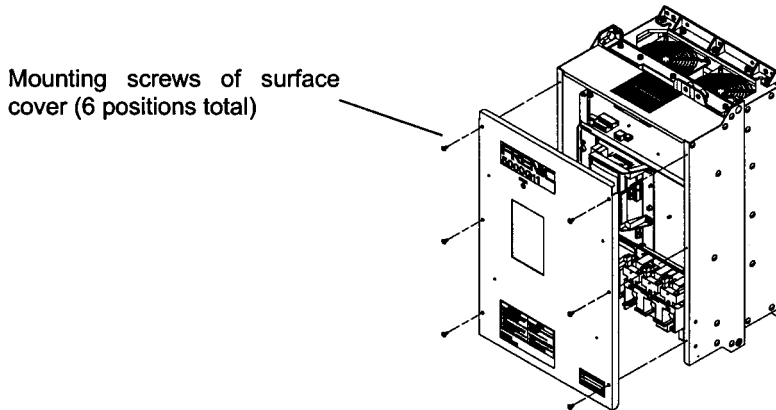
Removing the surface cover (for inverter of 30kW or more)
